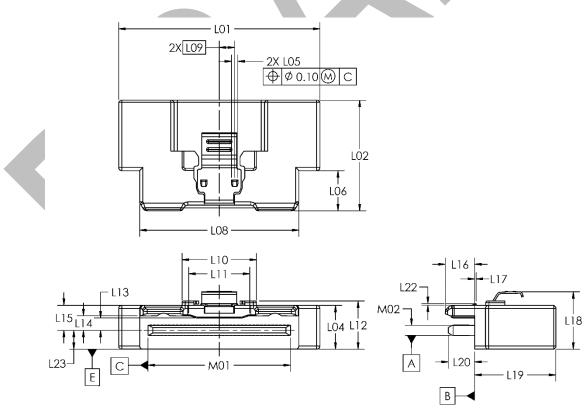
Straight Plug with No Side Flanges for 74 Contacts
